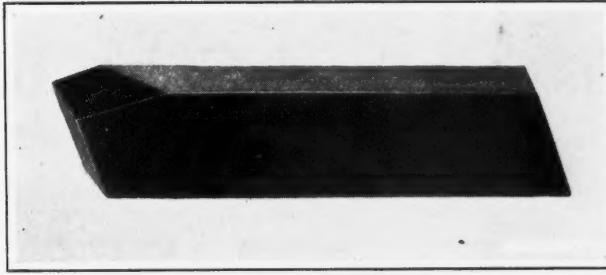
Stellite Cutter Blade employed on Ingersoll Milling Cutter Heads
